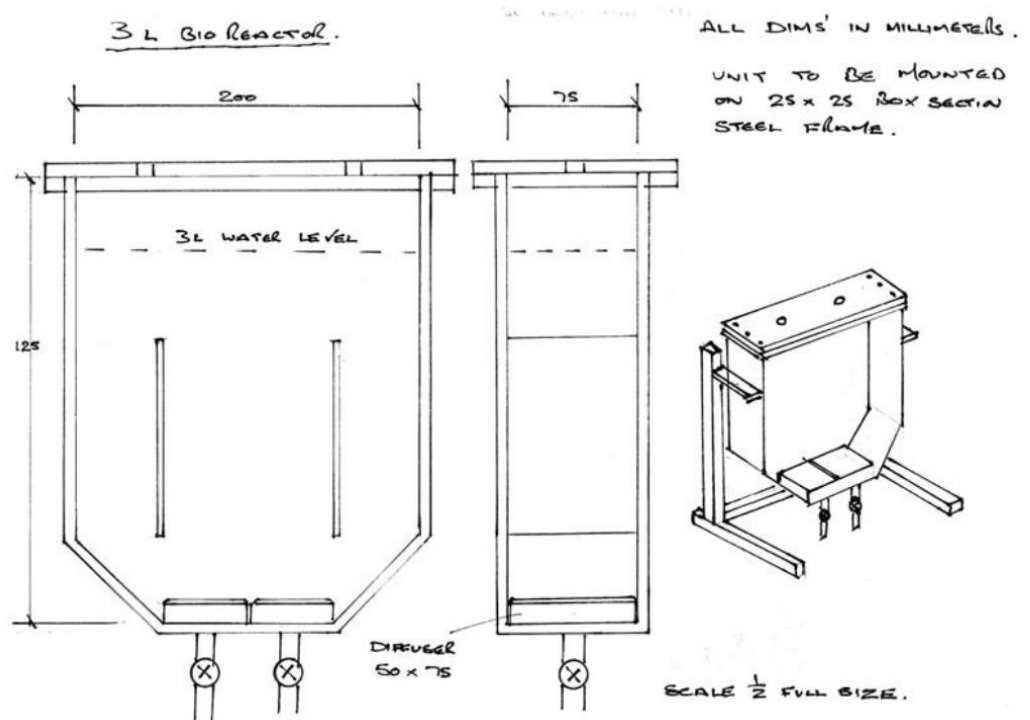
6. Technical drawing of 3L flat plate photo-bioreactor design. (Bangert, 2013)
